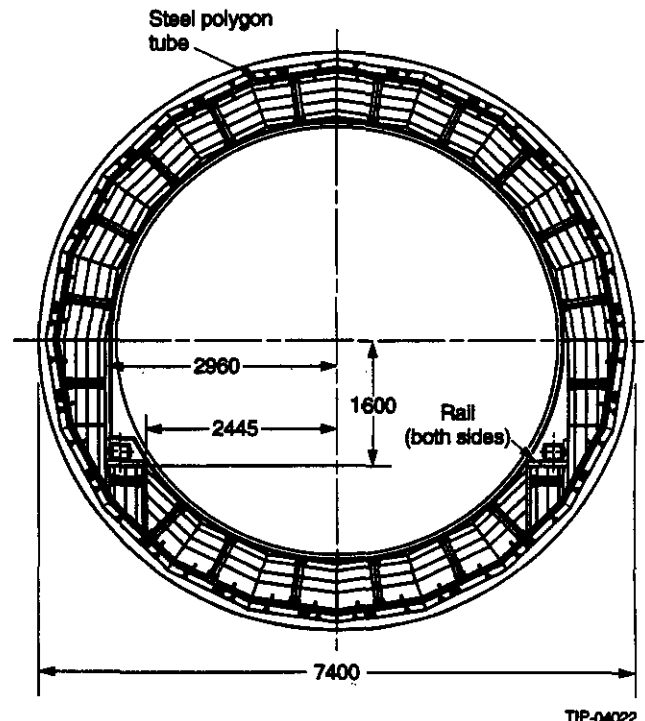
End view of scintillating barrel calorimeter. Rails structure on the inner side of SBC supports barrel and two endcaps of liquid calorimeter
